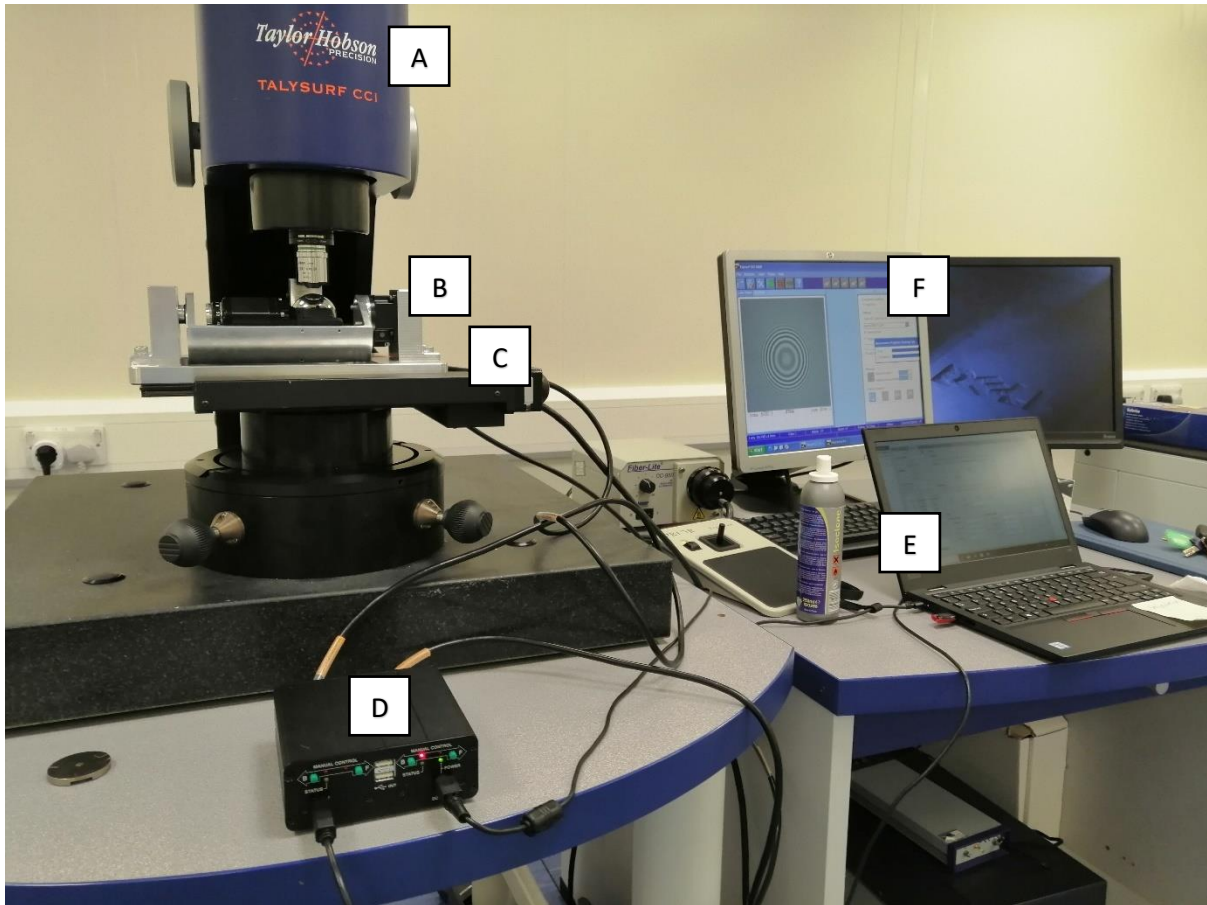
Fixture system in use with the Taylor Hobson Talysurf CCI. A: Talysurf CCI instrument, B: Fixture, C: XY motorised stages, D: Motor controller, E: Laptop controlling fixture system, F: Output from surface measurement sensor.
